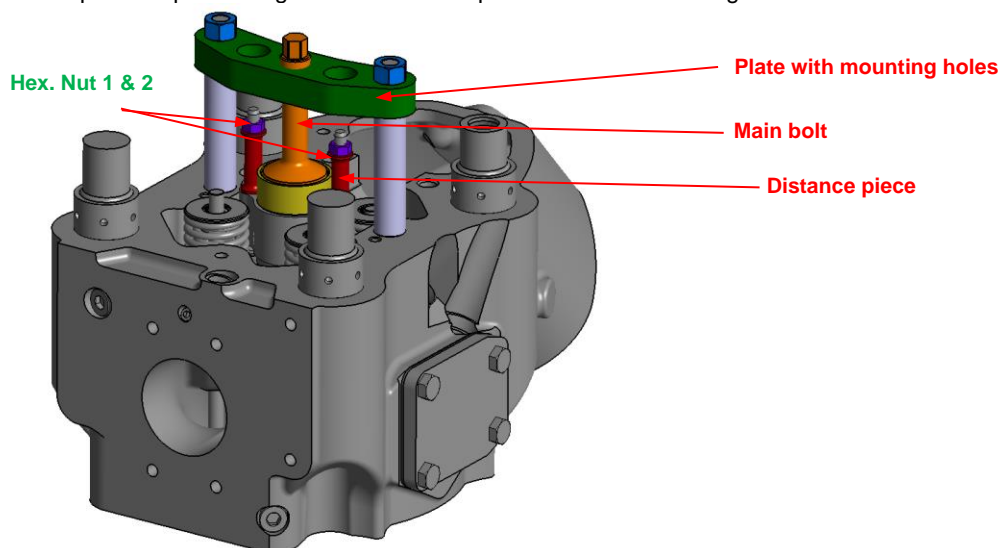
Mounting the distance pieces and nuts for the spectacle flange
